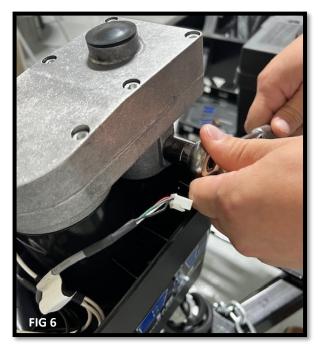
Using a 1/2" wrench or socket, remove the two bolts that hold the motor in place and set the motor aside.
